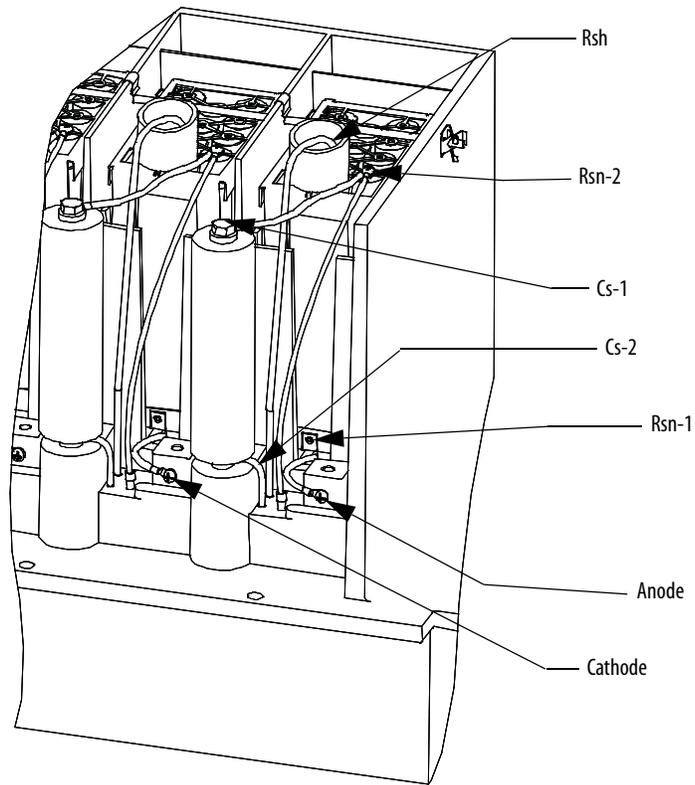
Snubber Circuit Assembly for SCR Rectifier Module
